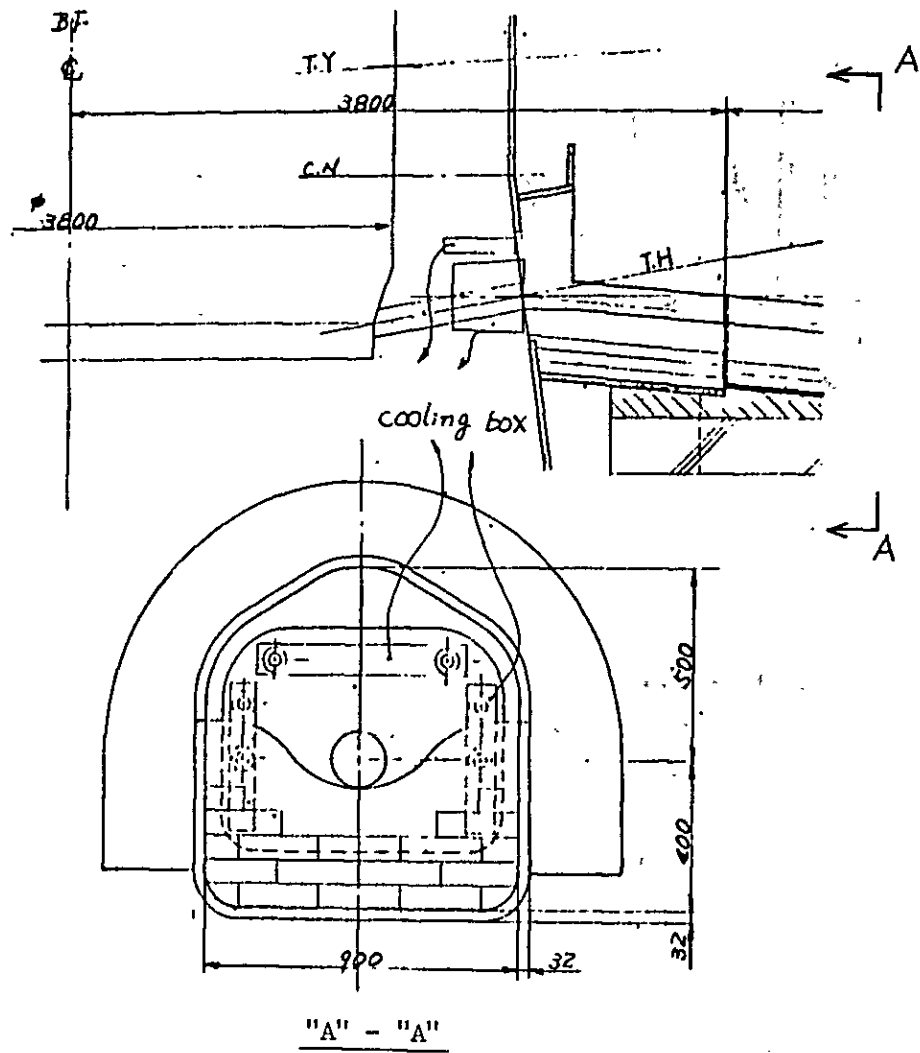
Layout of cooling boxes around the tap hole
